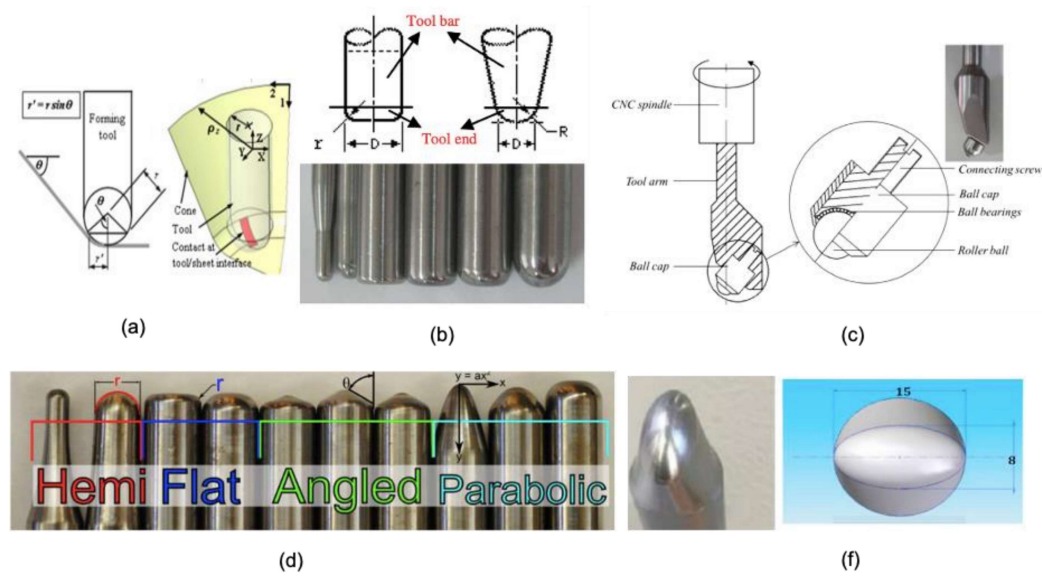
(a) Tool-sheet interface geometry [28], (b) Flat and hemispherical tools used by Ziren et al. [23], (c) Roller tool used by Lu et al. [24], (d) Different forming tools used by Cawley et al. [25], and (e) Elliptical tool used by Vanhove et al. [27].
